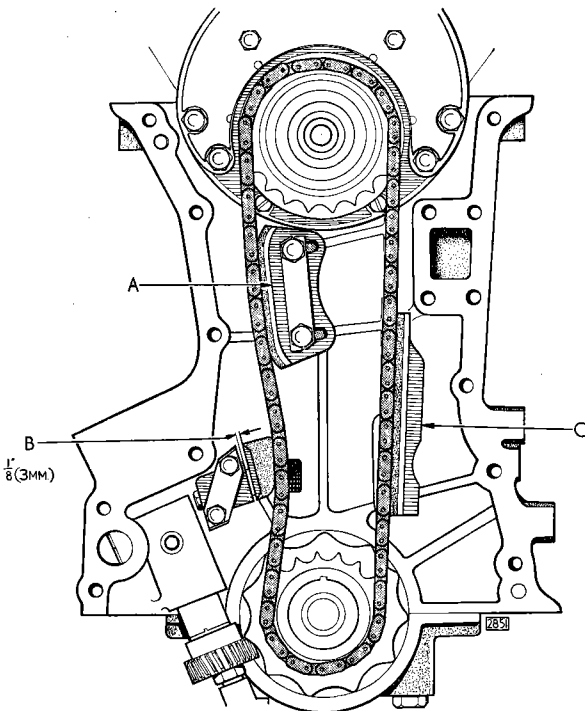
When fitting a new lower timing chain, set the intermediate damper (A) in light contact with the chain when there is $\frac{1}{8}$ " (3 mm.) gap between the rubber slipper and the tensioner body. In the case of a worn chain the gap (B) will be increased to avoid fouling between the chain and the cylinder block. Set the lower damper (C) in light contact with the chain.
